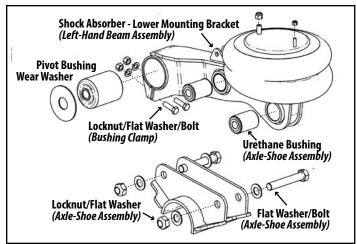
Hanger bushing replacement kit includes wear washers and bushing clamp hardware to replace three hanger assemblies.
